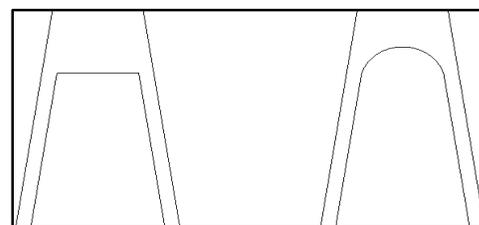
Previous Bulkhead Construction (left) vs. New Bulkhead Construction (right).
